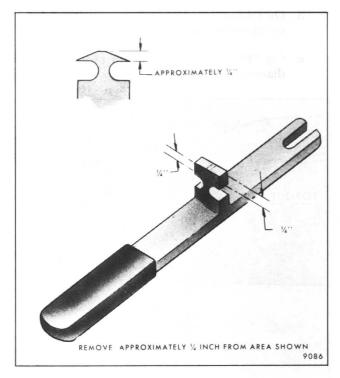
Modified "X" and "H" Torque Rod Tool
